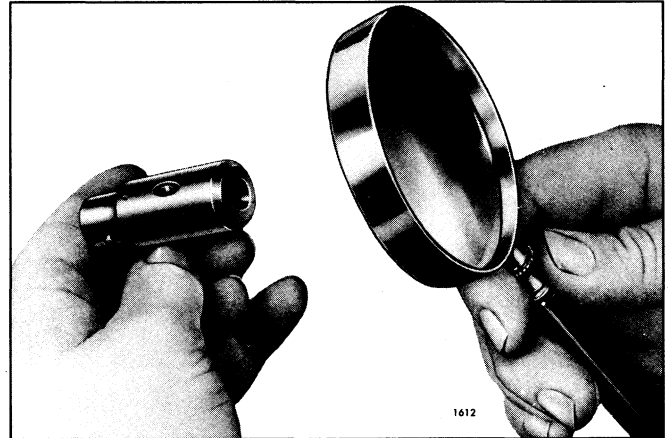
Examining Sealing Surface with a Magnifying Glass
